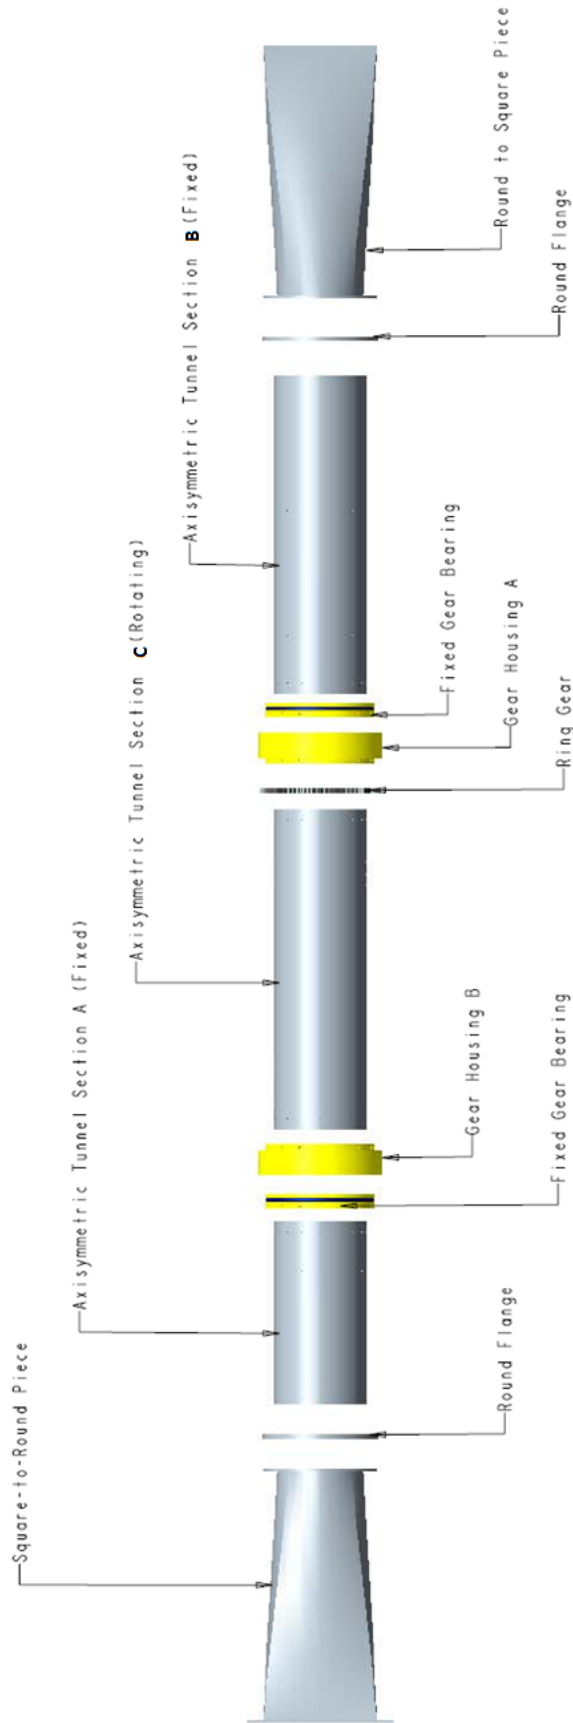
Exploded View of Key Components of the Axisymmetric Test Section
